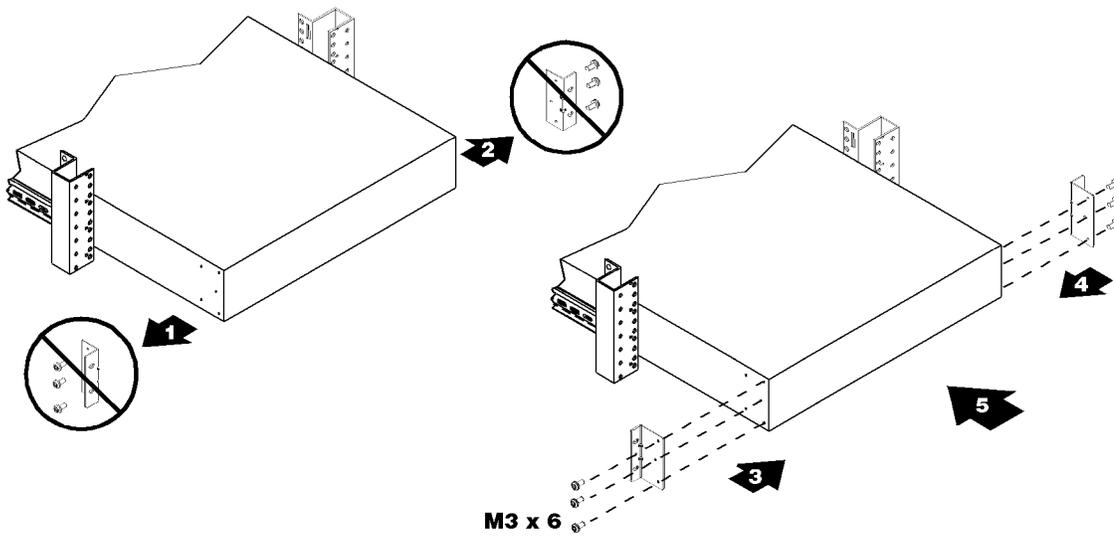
Securing Unit At Front And Mounting Bezel Clamp
